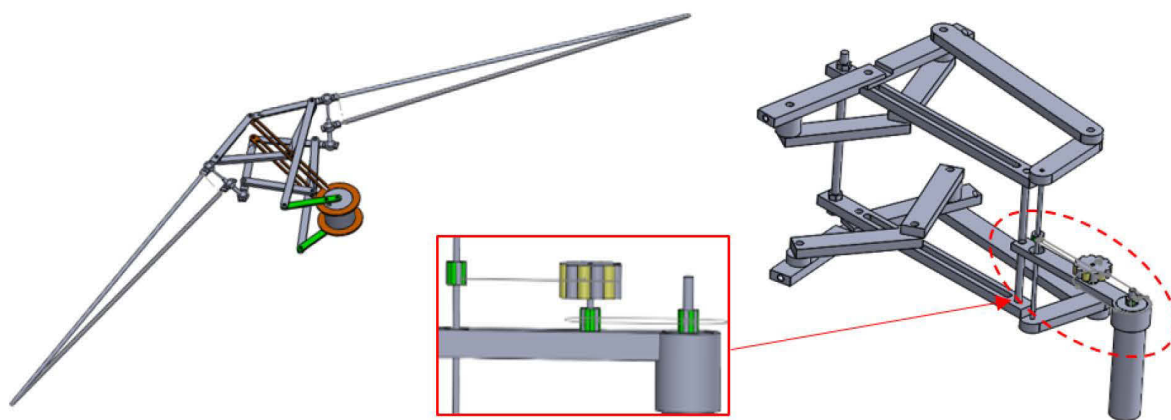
Prototype 1.4 Full Assembly Model (Left) and Details of the Flapping (Right) and Driving Gears, Belts and Motor (Center)
